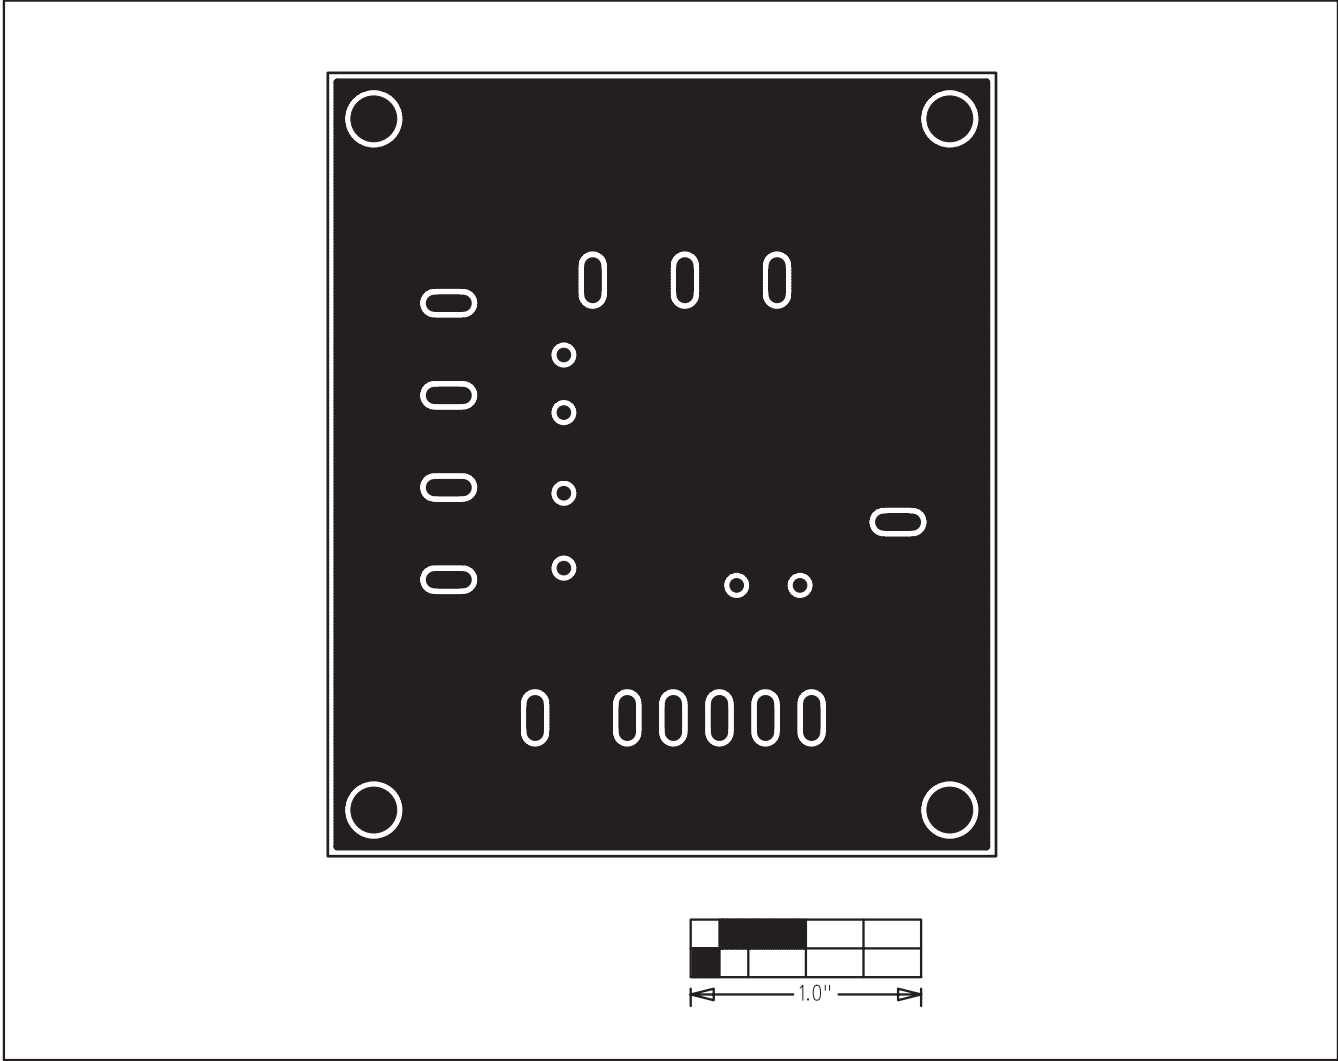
MAX17109 EV Kit PCB Layout—Solder Side
